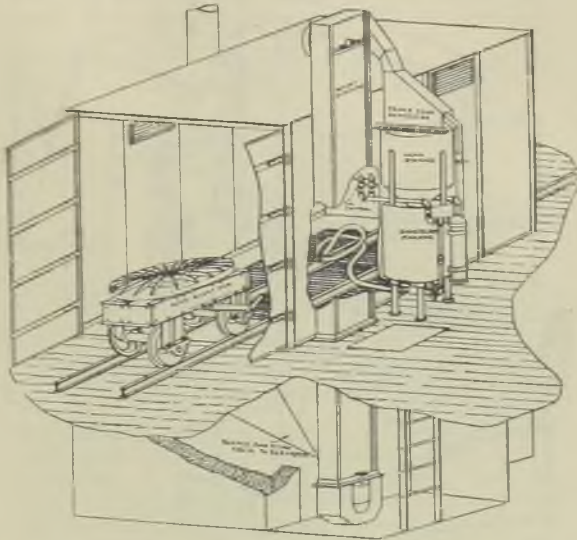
PERSPECTIVE SECTIONAL ELEVATION OF DOELCAM SAND BLAST INSTALLATION WITH CAR AND TRACK.
